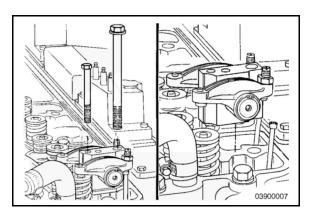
REMOVE THE CAPSCREWS, PEDESTALS, AND ROCKER LEVER ASSEMBLIES
